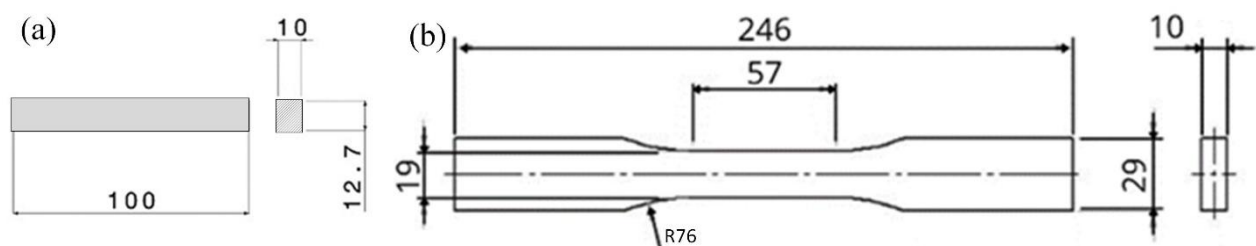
Geometry of the test specimens: (a) bending test specimen and (b) tensile test specimen.
